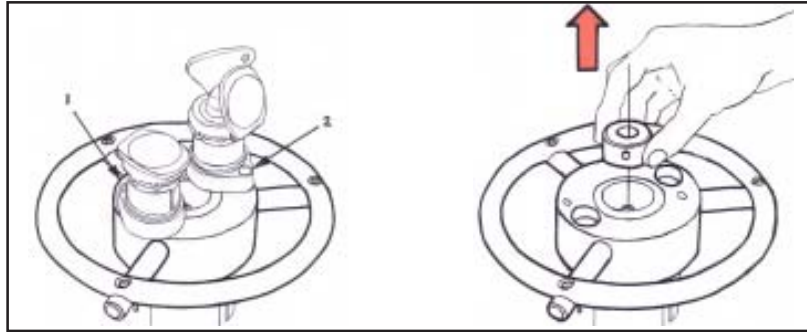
Remove the security nut from the interlock. This may require the removal of the CLS locks depending on the interlocks size. The locks can be removed by removing screws marked 1 & 2. Immediately refit the locks as before.
